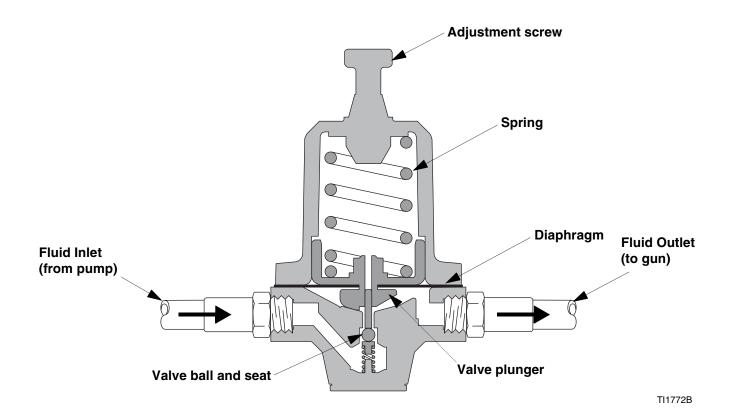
Cutaway of Mechanical Fluid Pressure Regulator
